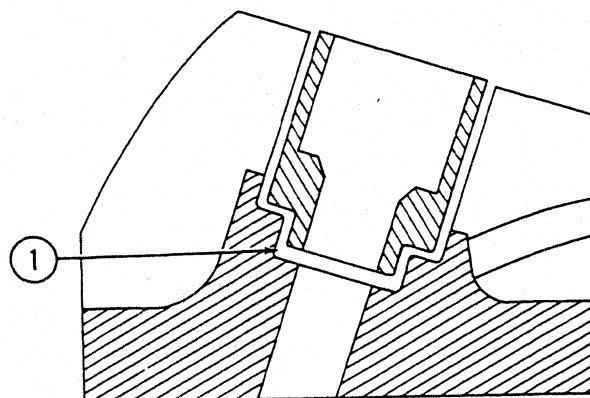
CROSS SECTION OF T-82340 INJECTION SLEEVE SEATED IN HEAD (Before Swaging)(Typical)
